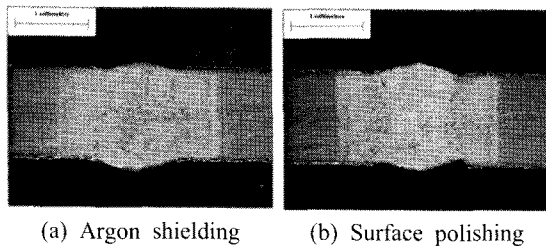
Cross sections of applied argon shielding gas to 16l/min (a) and surface polishing to remove Al-Si coated layer (b).
